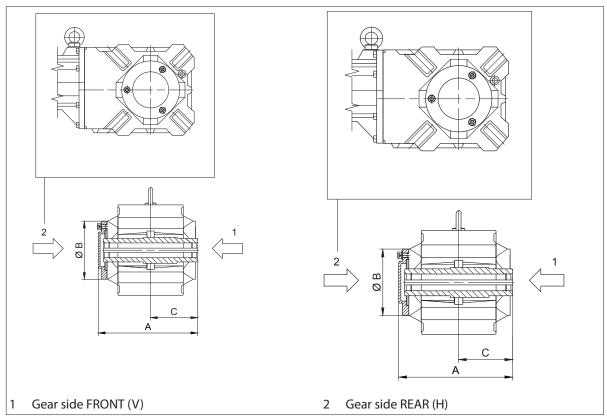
SSV cover for worm gearbox BS10 ... BS40 - sealing caps (left), sealing cover (right)
